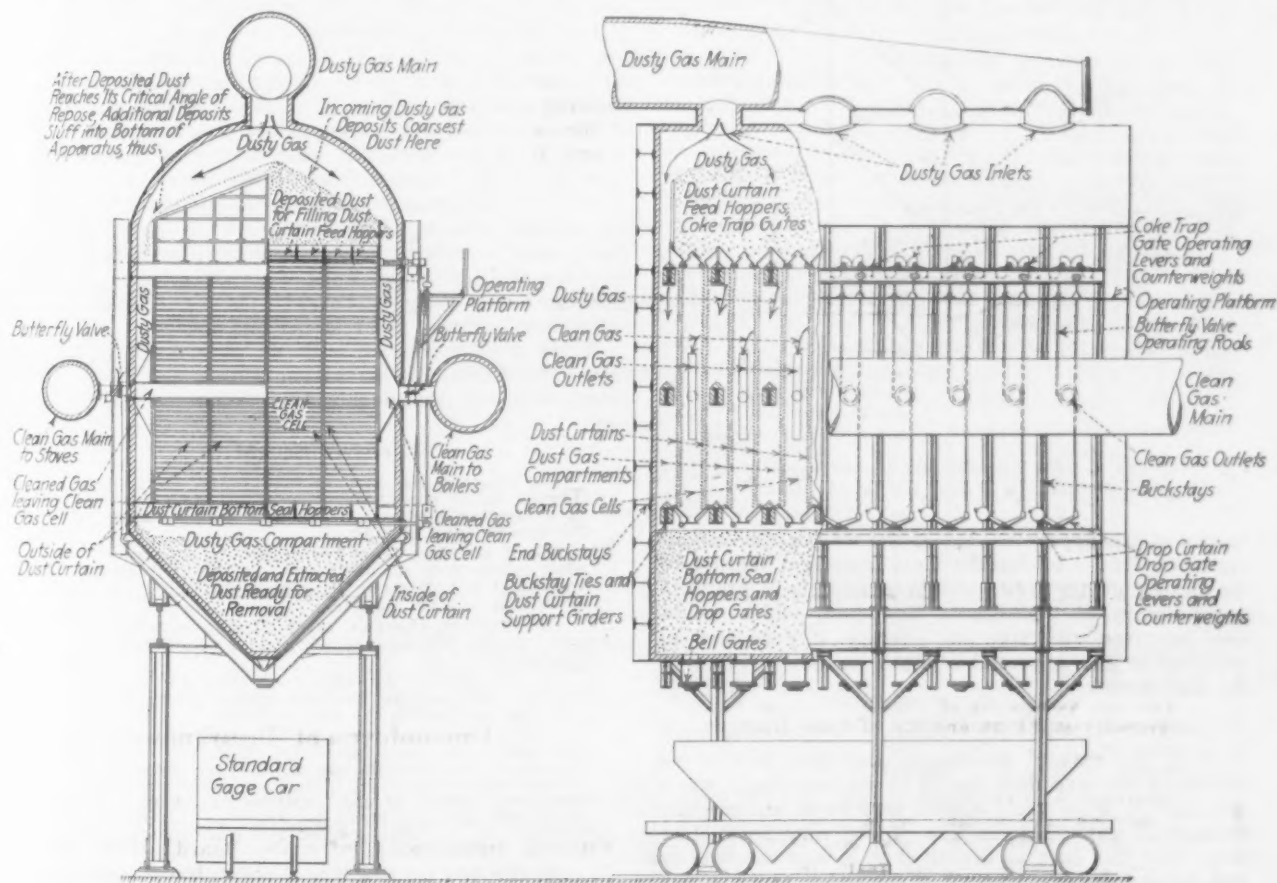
Suggested Arrangement of a Full Sized Dry Cleaner for a 600-Ton Blast Furnace, There Being Eight Cells, One of Which Serves as a Spare
